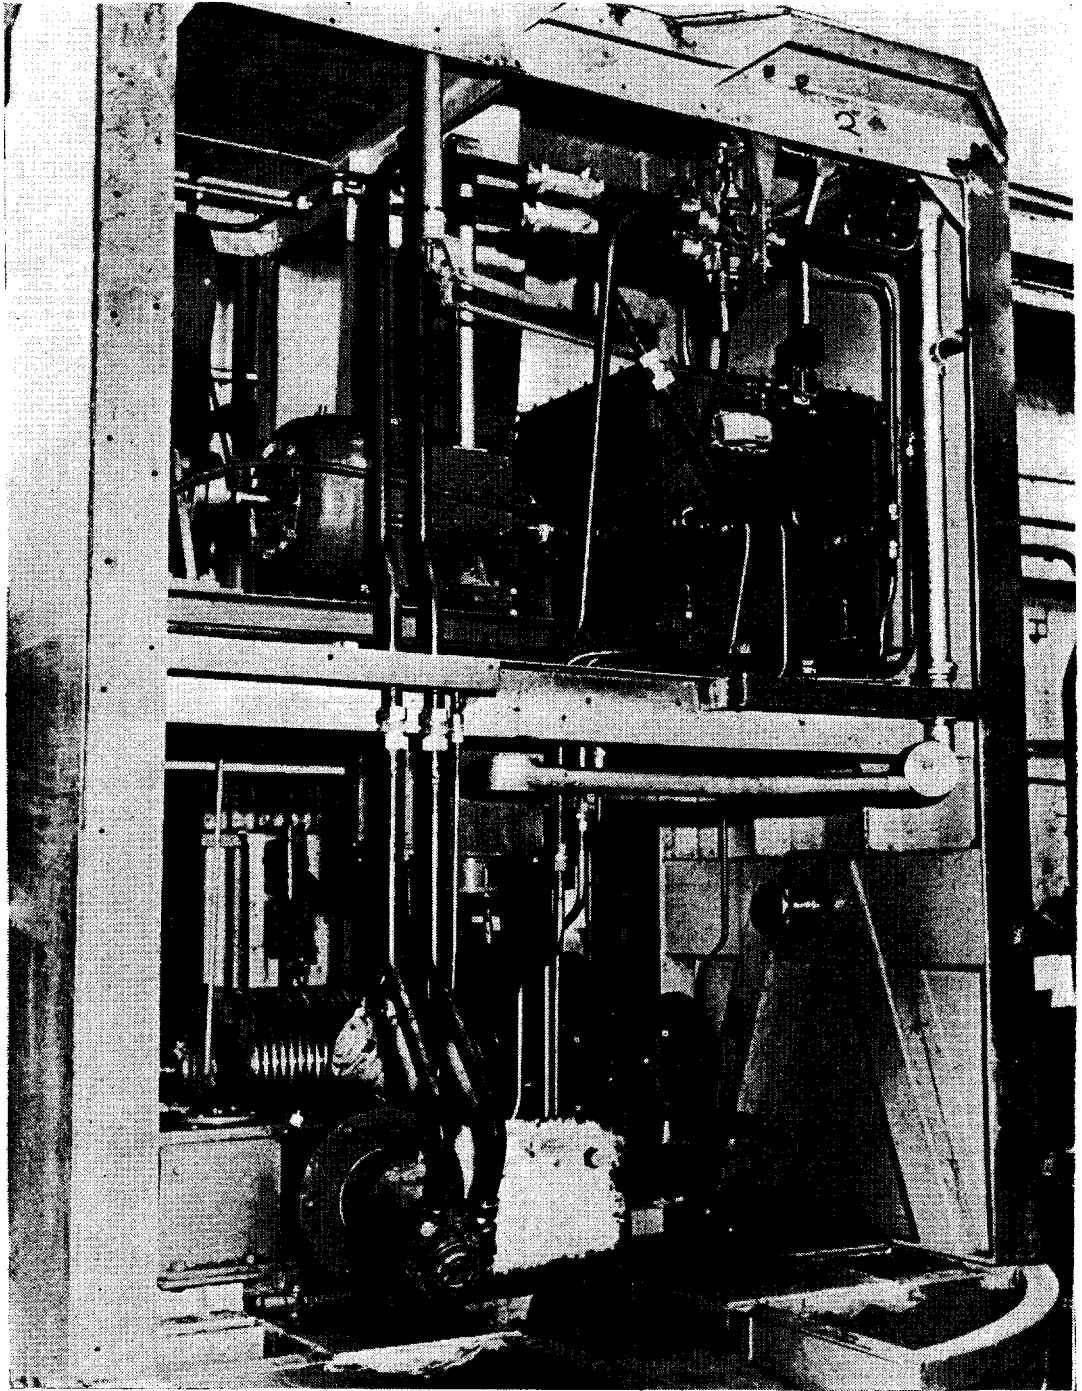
SHOWING THE HYDRAULIC LAYOUT OF A STEVEDORE CRANE
